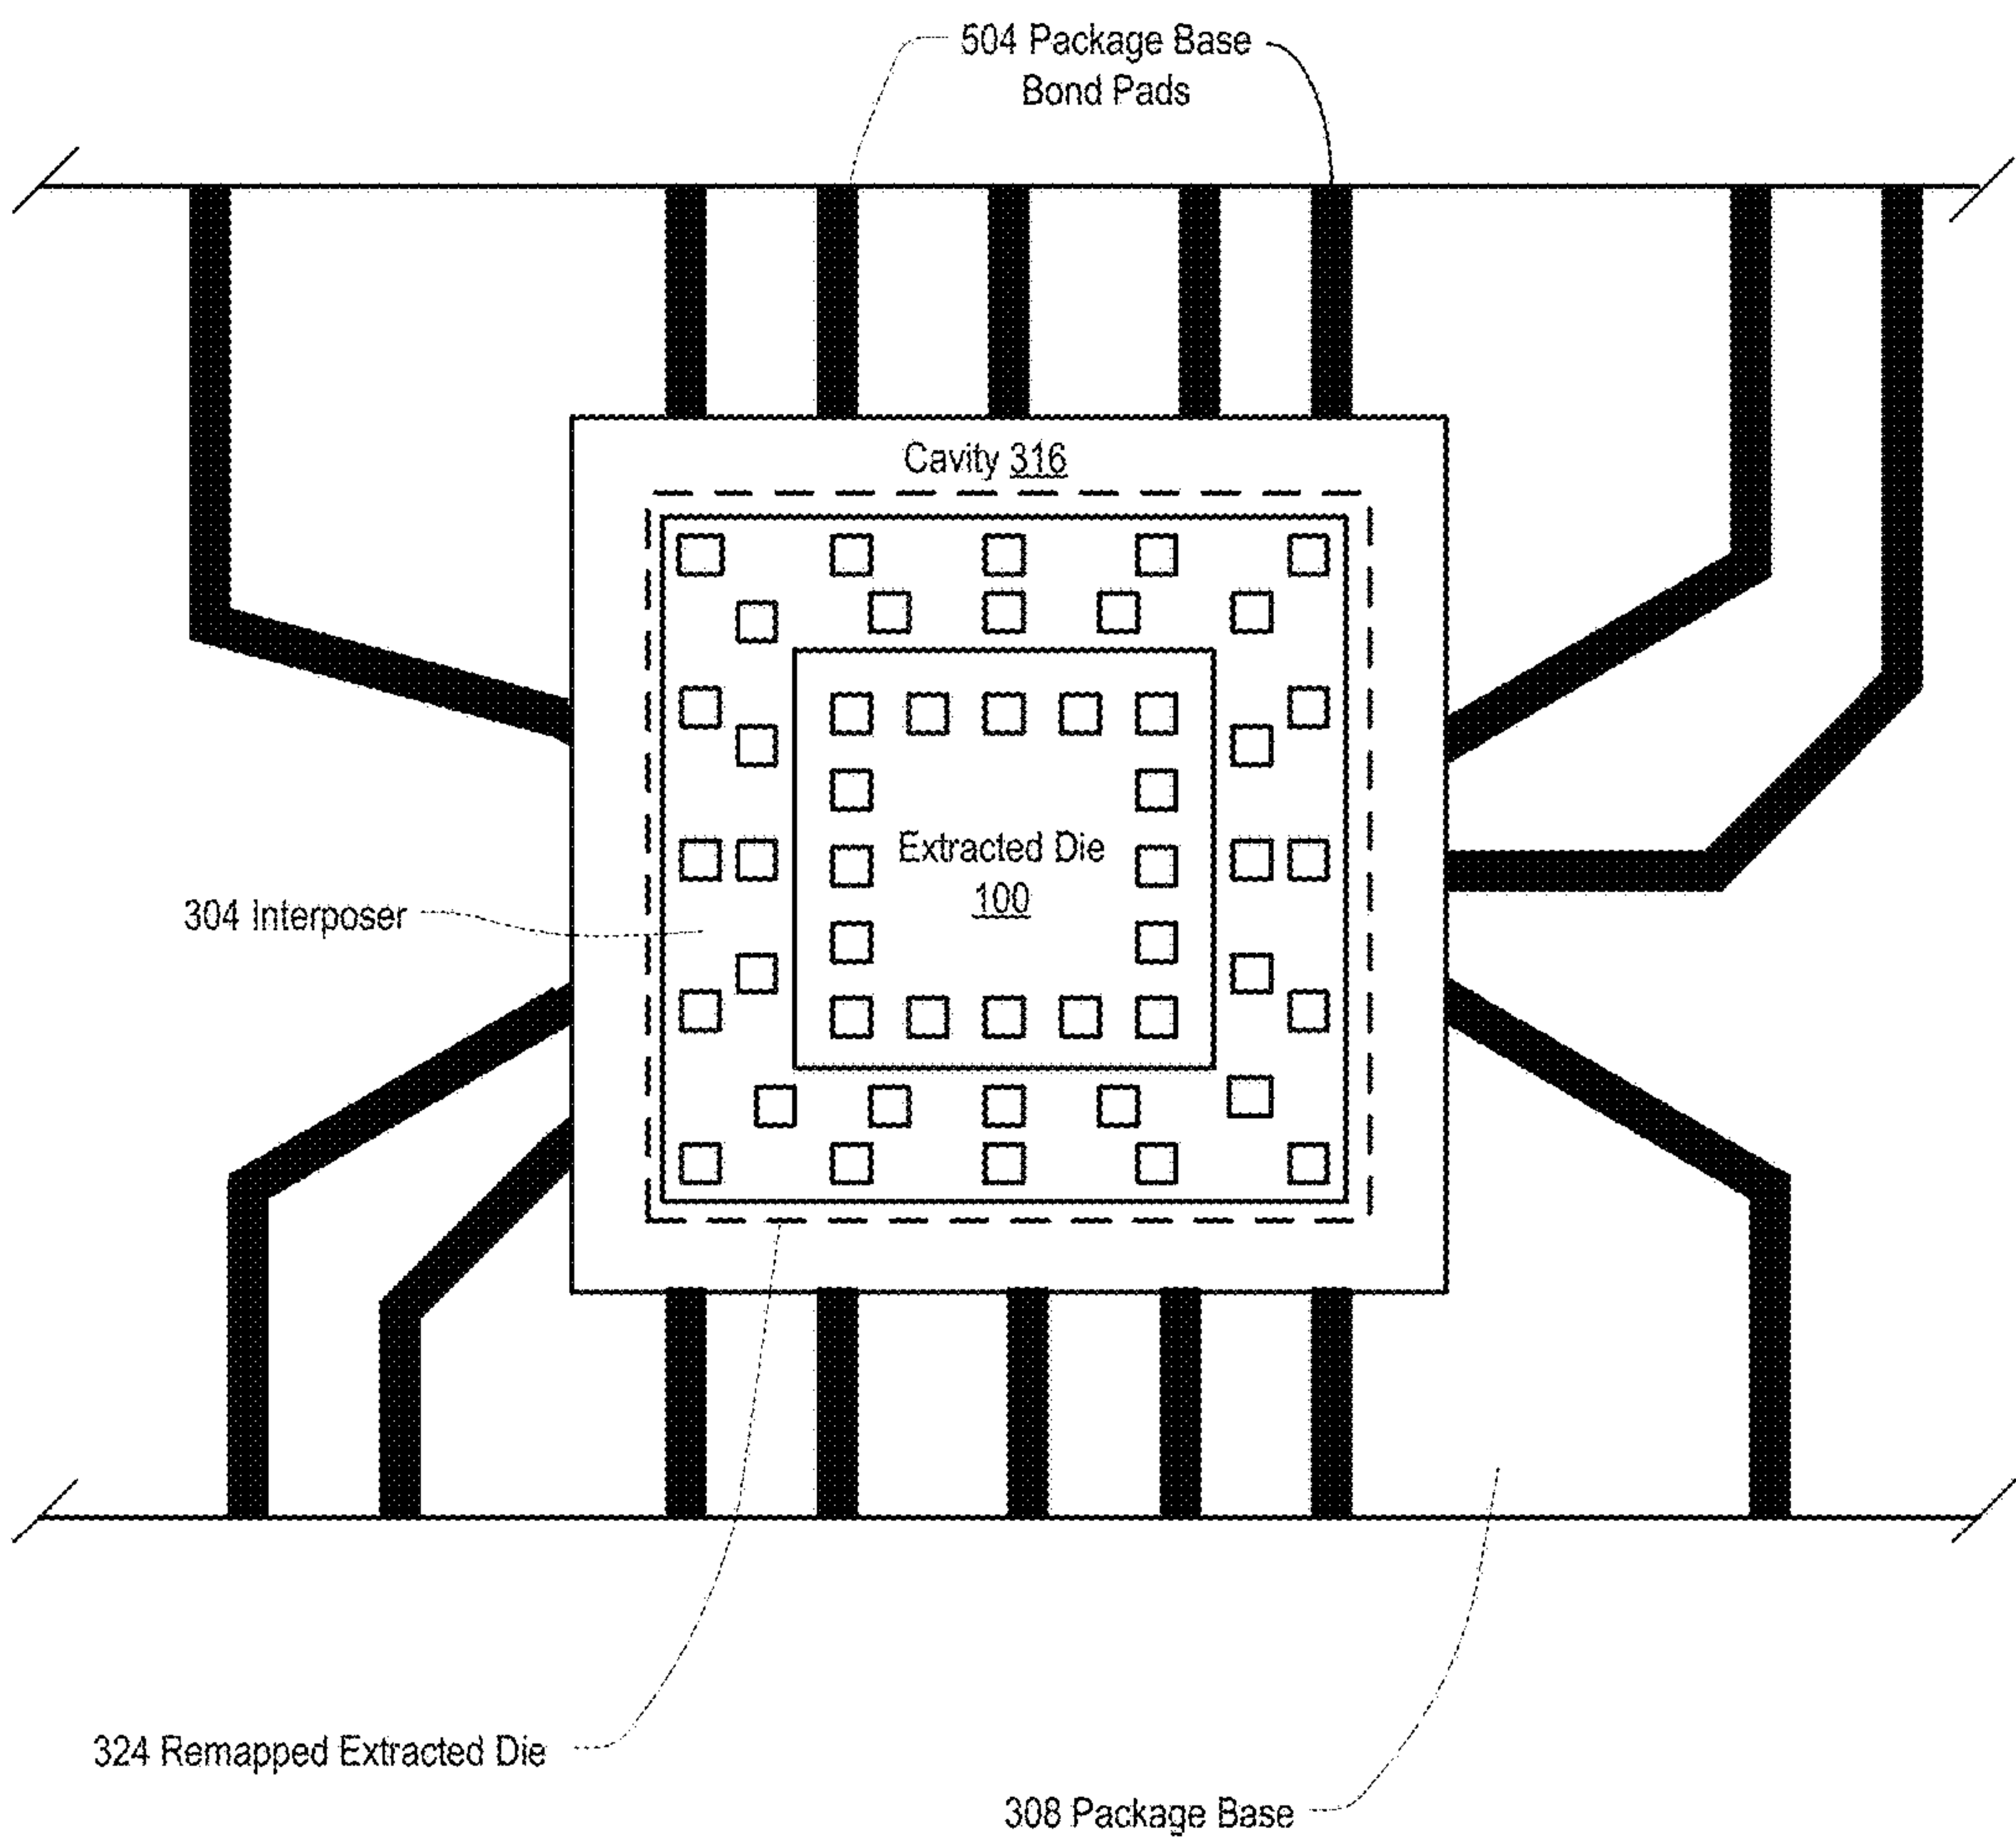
B Top View of New Package Base After 3D Printing Bond Connections
